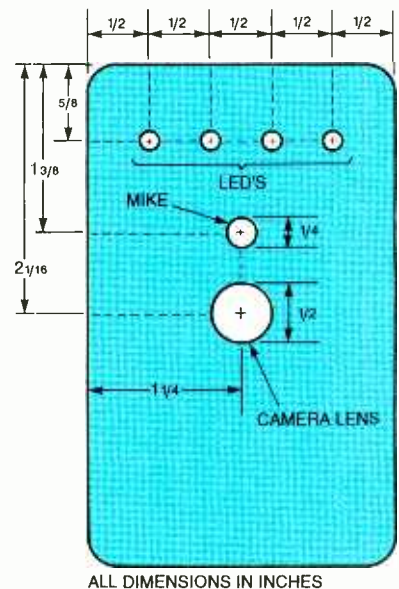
Prepare the front (camera) case as shown in this drilling guide. Four additional holes will also be drilled in the rear (bottom) of this case.
